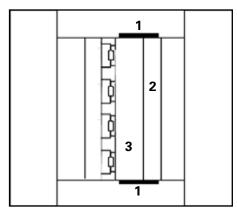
Latch Cavity Plate to Manifold Plate 1. Latches 2. Manifold Plate 3. Cavity Plate
